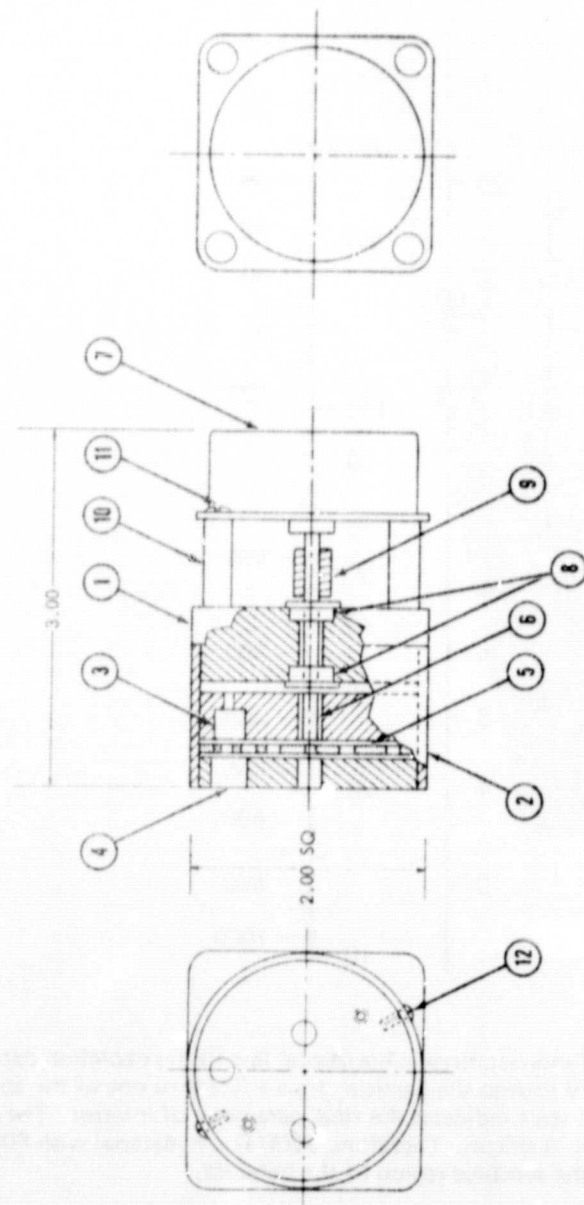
Laboratory Model of the 3 Bit Encoder Assembly
